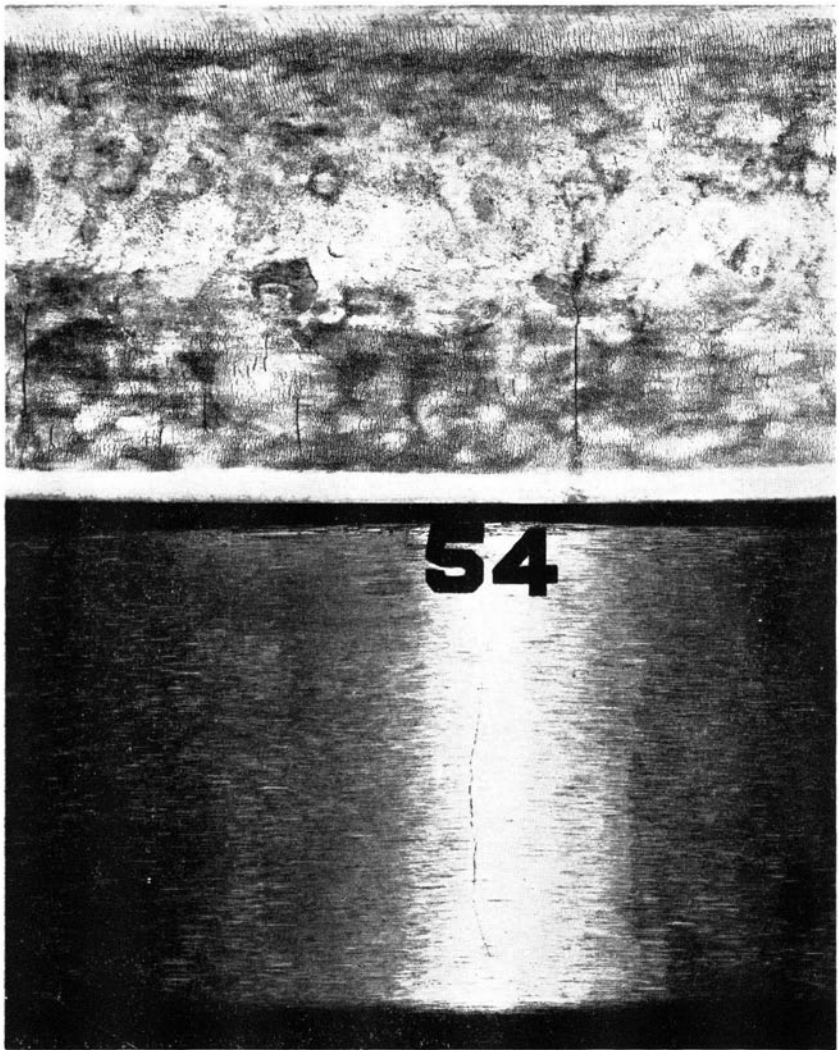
TYPICAL THERMAL CRACKS IN WHEEL TREADS
